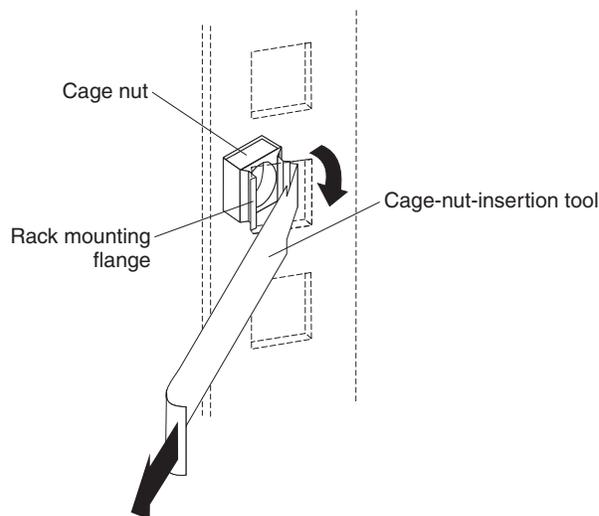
Installing cage nuts with the cage-nut-insertion tool
